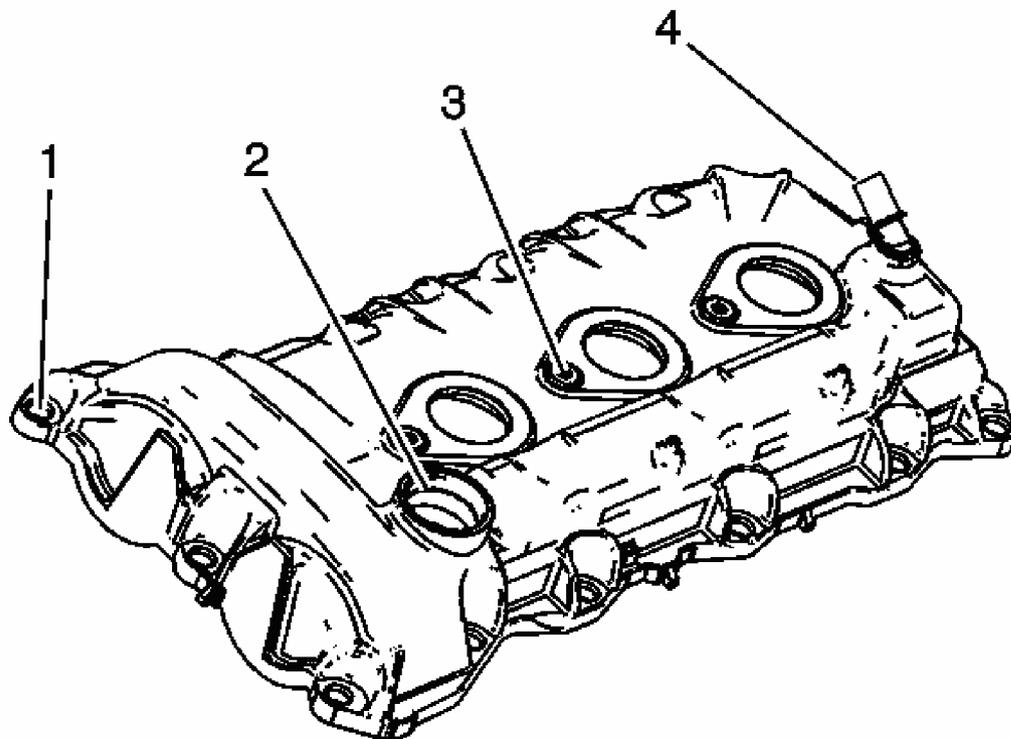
Inspecting Exterior Of The Left Camshaft Cover
